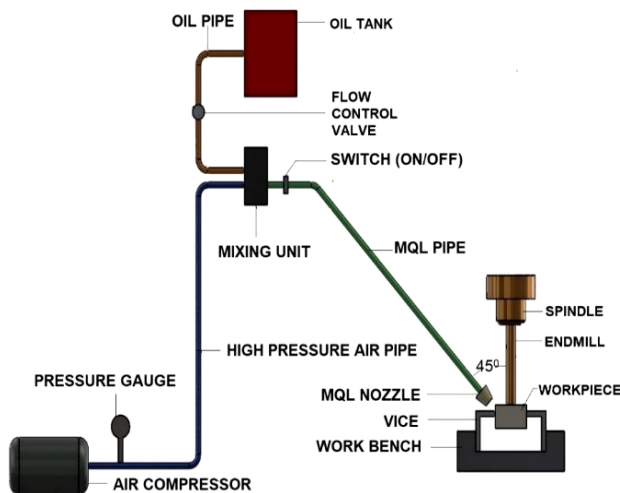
Experimental process of AISI 1045 steel milling with MQL
